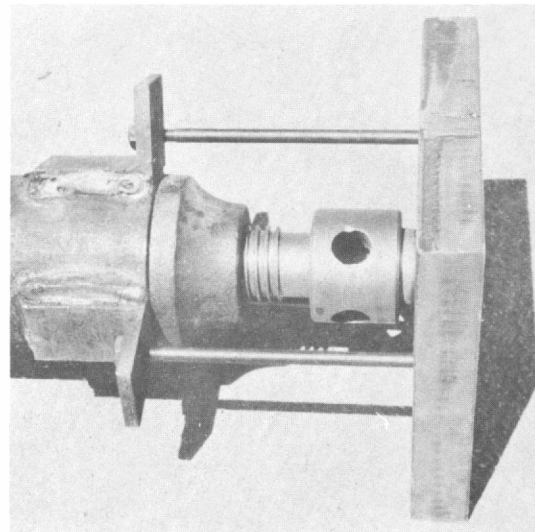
C ADJUSTABLE SCREW ASSEMBLY
